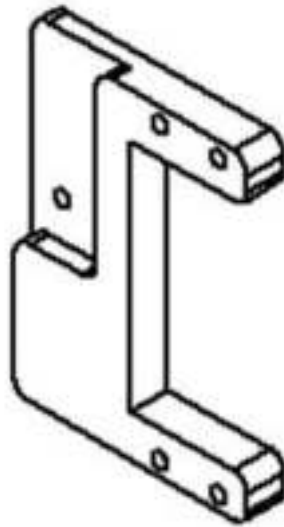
Drawing of the $\frac{1}{4}$ " 6061 Aluminum Mounting Plate for the High Torque servo motor
